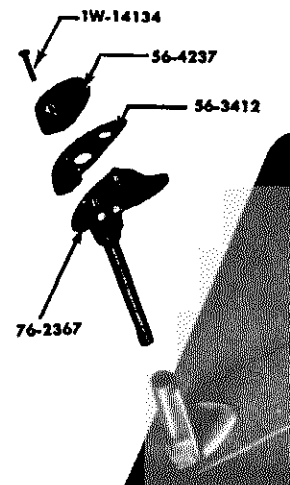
SEPARATOR-POST-ASSEMBLY REMOVAL
